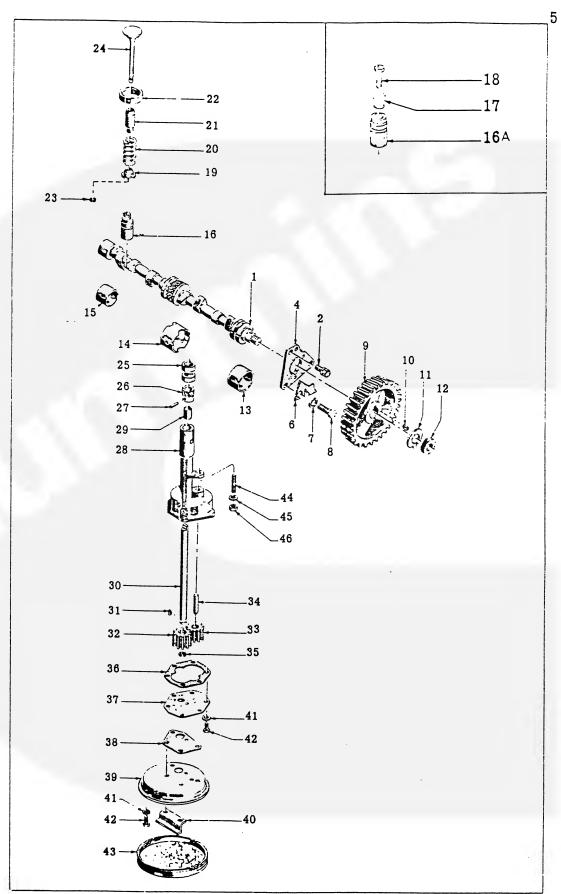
CAMSHAFT & OIL PUMP PARTS GROUP
